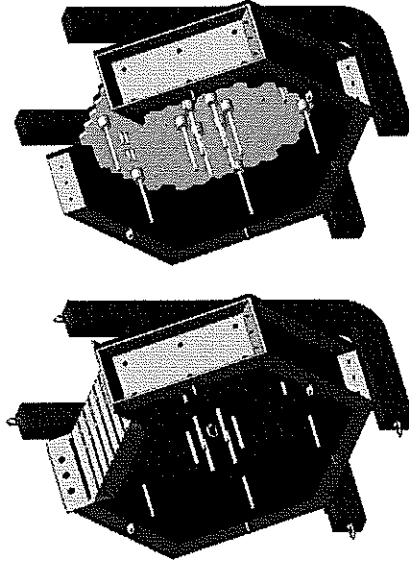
RENDER OF THE CORE MOLD SHOWN IN THE "414031 LOWER PLENUM FLOOR" CONFIGURATION: FULL ASSEMBLY (LEFT) AND WITH THE FRONT PLATE, TOP AND CAP REMOVED FOR CLARITY (RIGHT).
